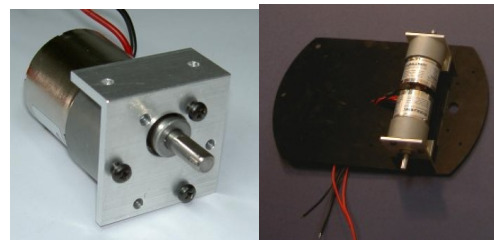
L shape Motor support (left) and robot base with two motors on (right)
